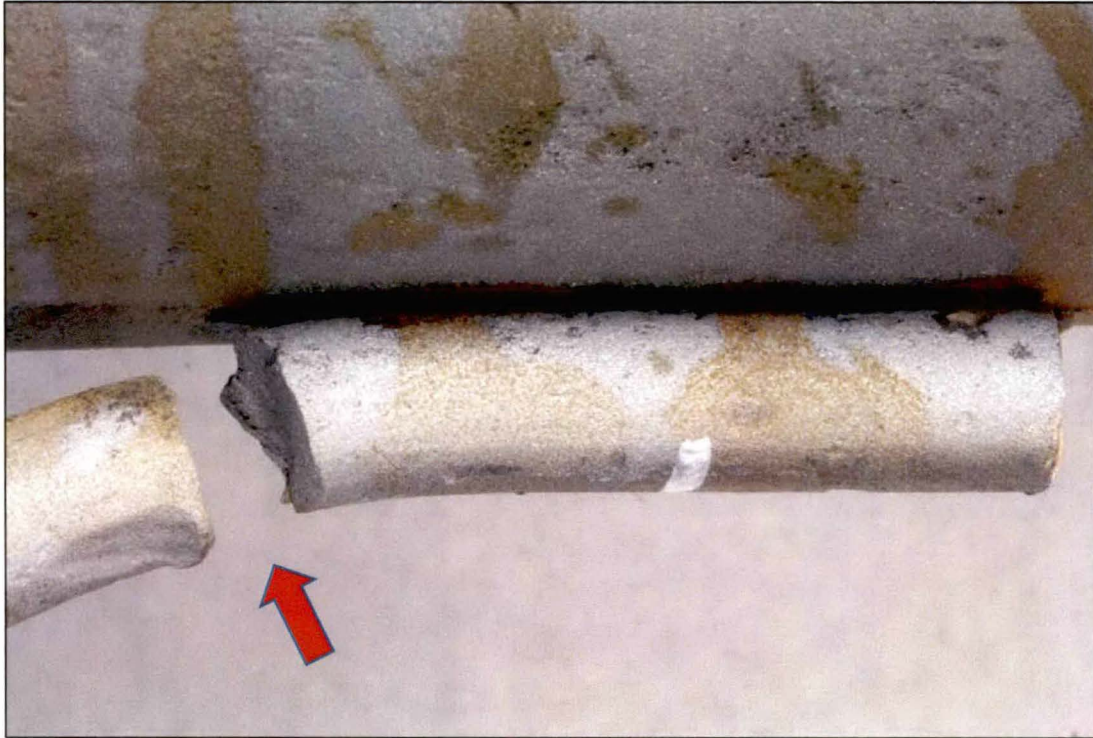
Image of the Rod Side B bottom joint region showing the absence of a weld. The rod fracture location is identified by an arrow.
